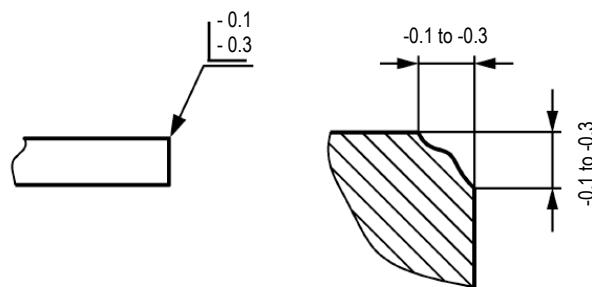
Outer edge, free of burrs, removal - 0.1 to - 0.3
